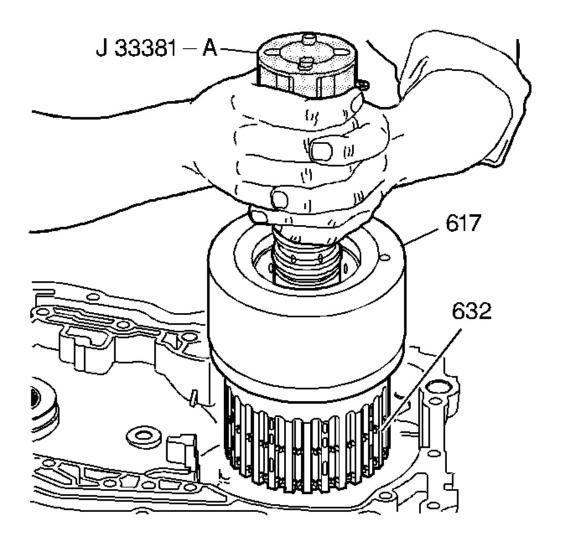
Installing J 33381-A Onto Input Clutch Housing Assembly Courtesy of GENERAL MOTORS CORP.
